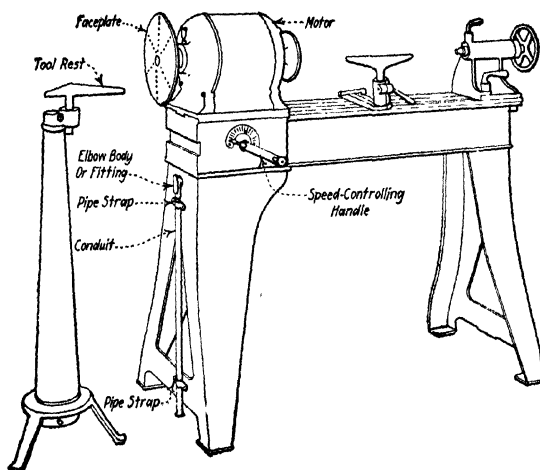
A headstock-motor wood-turning lathe with wiring all concealed. Control device is enclosed in the bed of the lathe.
